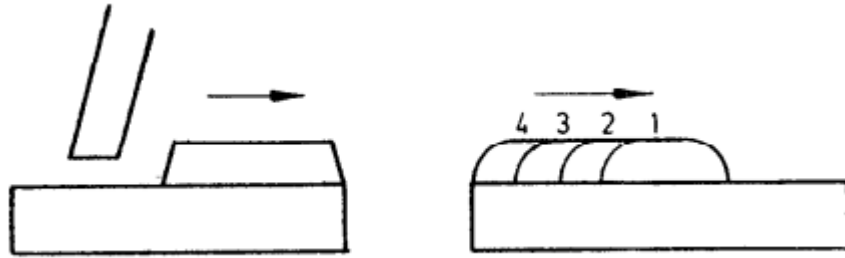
SEQUENCE OF BACK STEP WELDING
